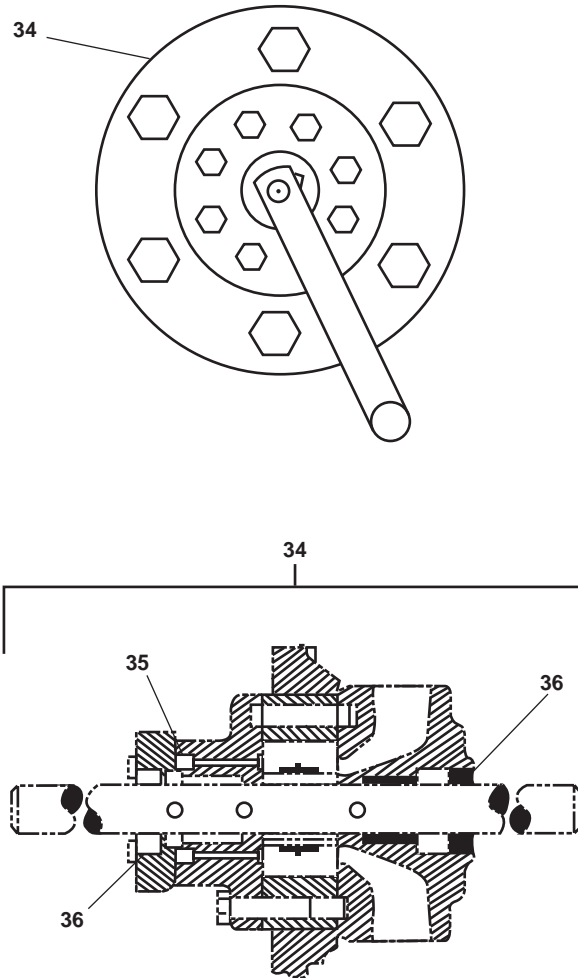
Hydraulic Watertight Doors (Sheet 7 of 9)
